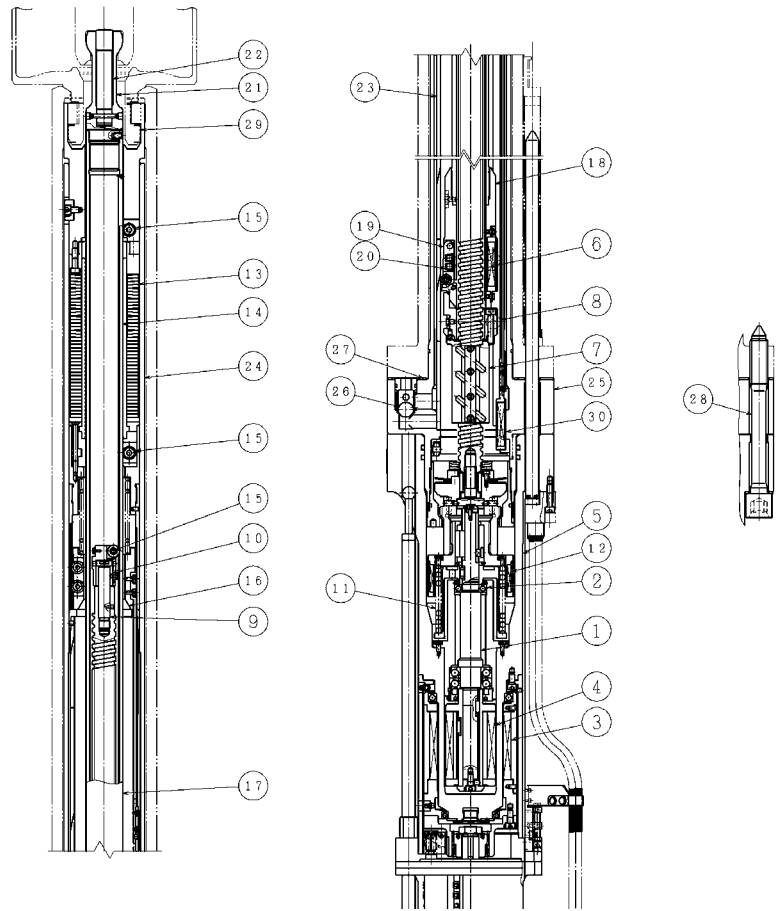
Fine Motion Control Rod Drive Unit (Cutaway)
